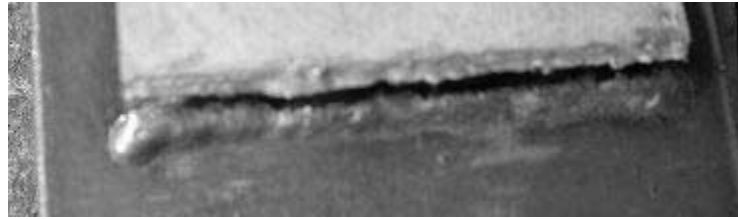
Fillet weld in 3.0-mm sheet steel produced by Fabricator A
